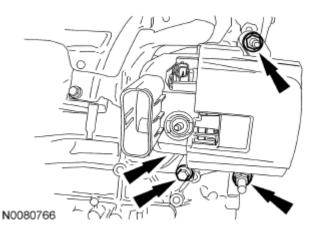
Locating Generator With Nuts And Bolts Courtesy of FORD MOTOR CO.
